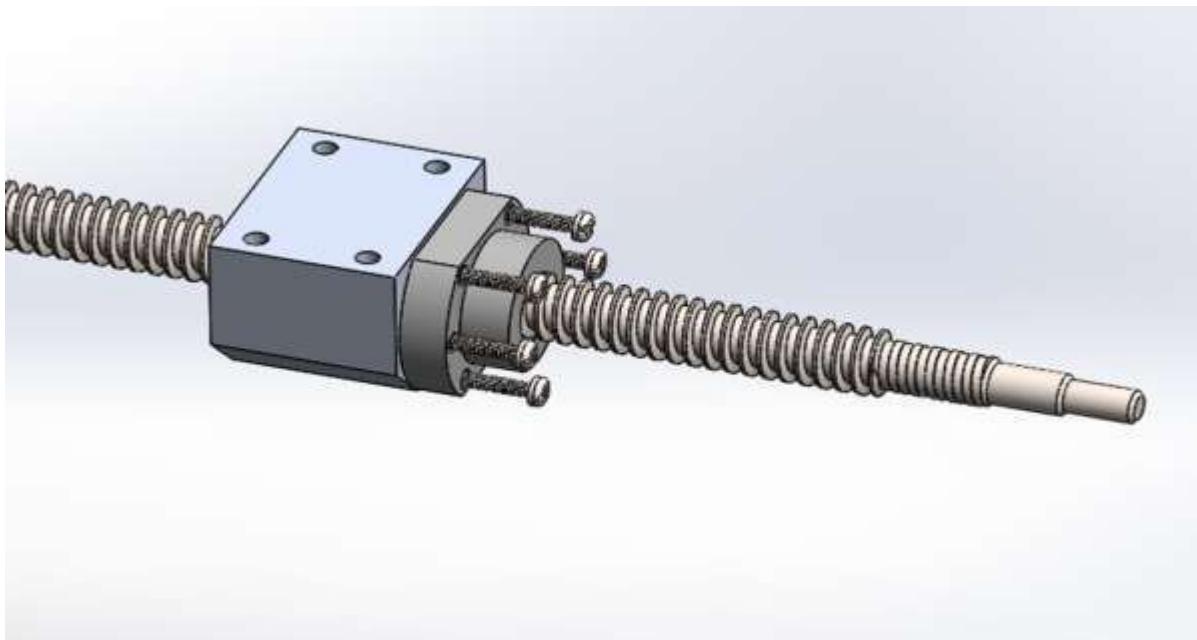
install nut lead Screw Nut Seat Bracket Holder Mount Housing by using screws.
